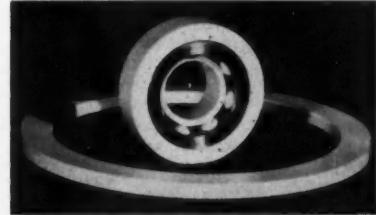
Seal ring and ball bearing with Pyroceram wearing surface.
